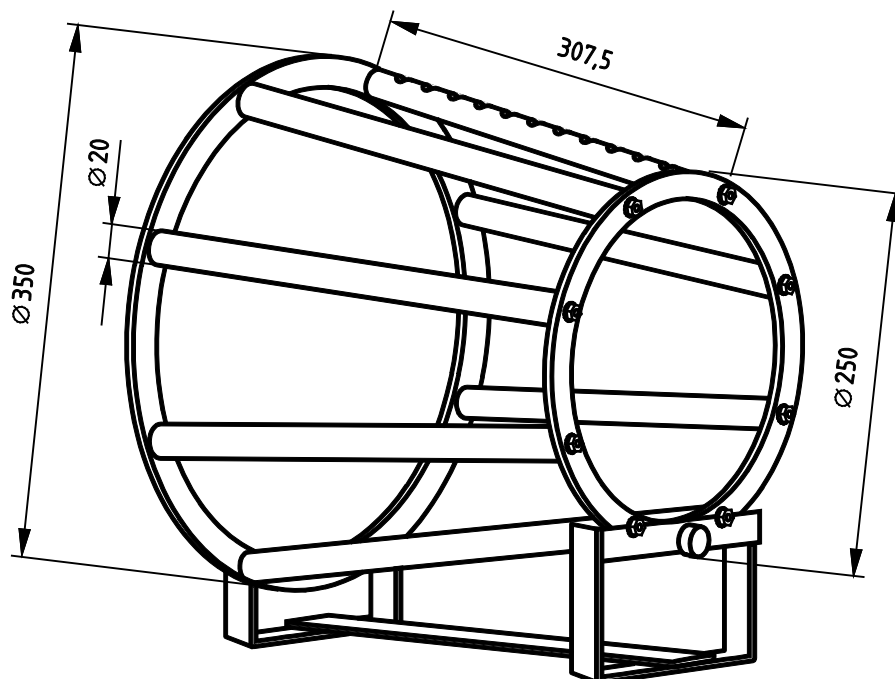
Test apparatus — mounting arrangement for testing linear heat detectors
